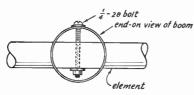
The center element section is held in the boom with a $\frac{1}{4}$ -28 machine screw, nut and lock washer. The guy wire attaches to the head of the bolt.
